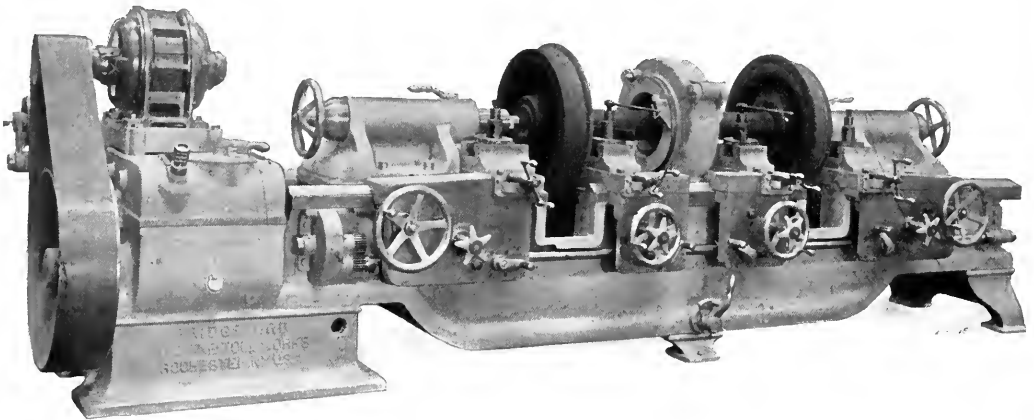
Bridgeford Lathe with Regular Carriages and Two Extra Inside Carriages
